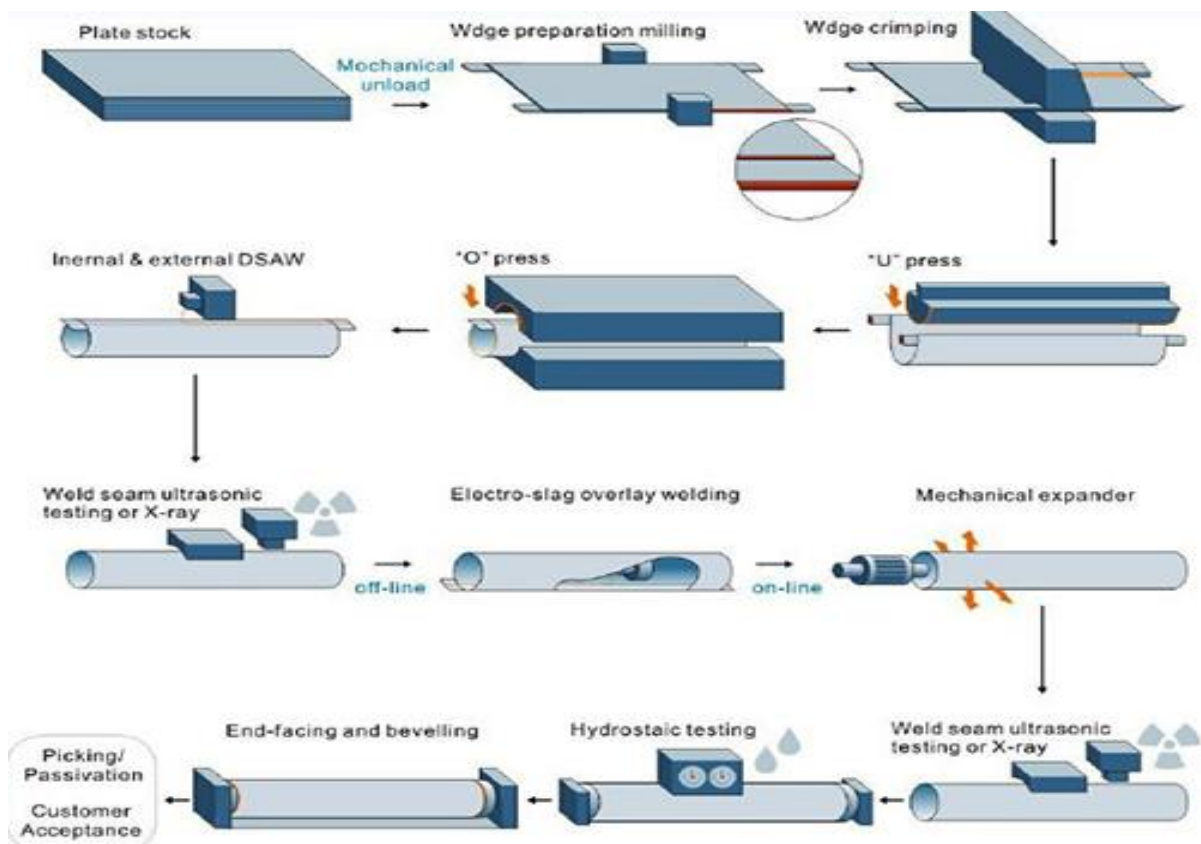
9 Longitudinal submerged welded (LSAW) [37].
